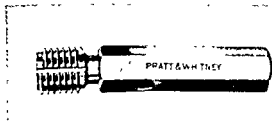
Thread plug gage. (Pratt & Whitney Co.)
